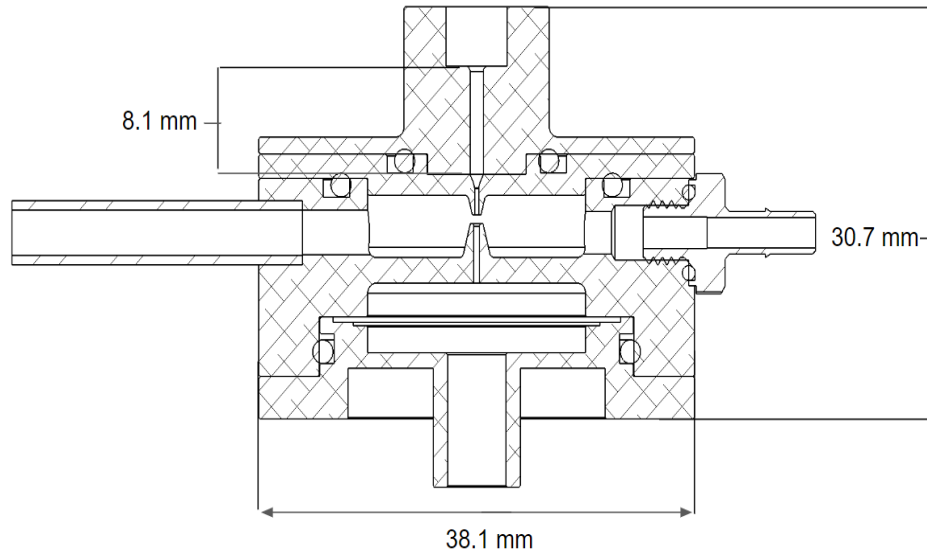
Cross-section of CAD model of the second impactor optimized for focusing. The geometry is referred to as the “Short Inlet” geometry due to its short nozzle inlet.
